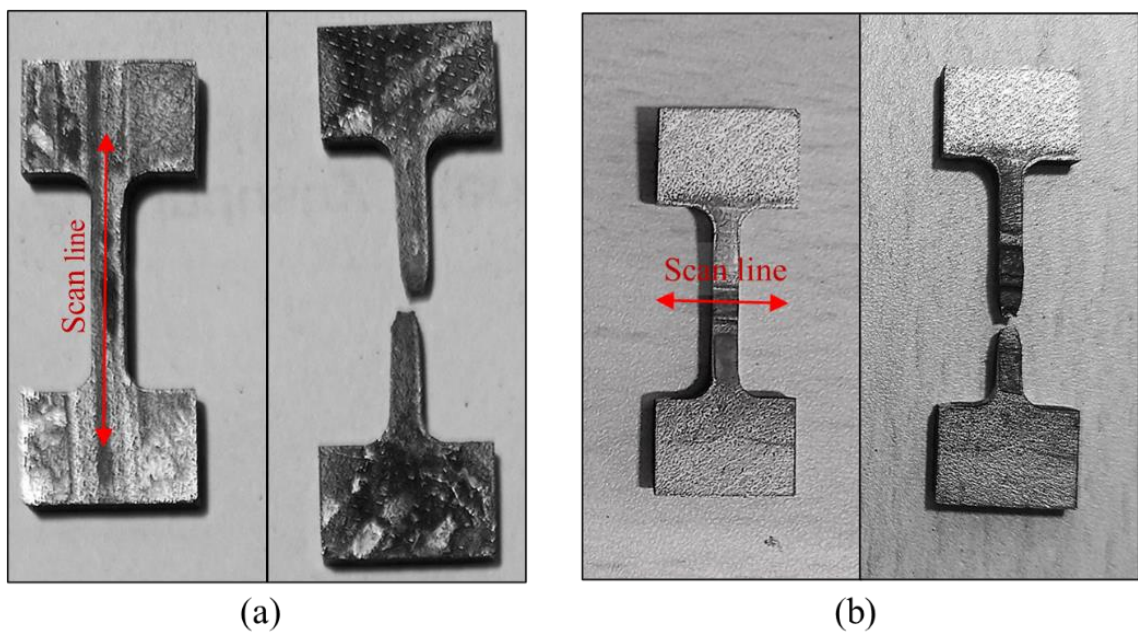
Initial and final condition of tensile test specimens (a) along (b) perpendicular to the scan line
